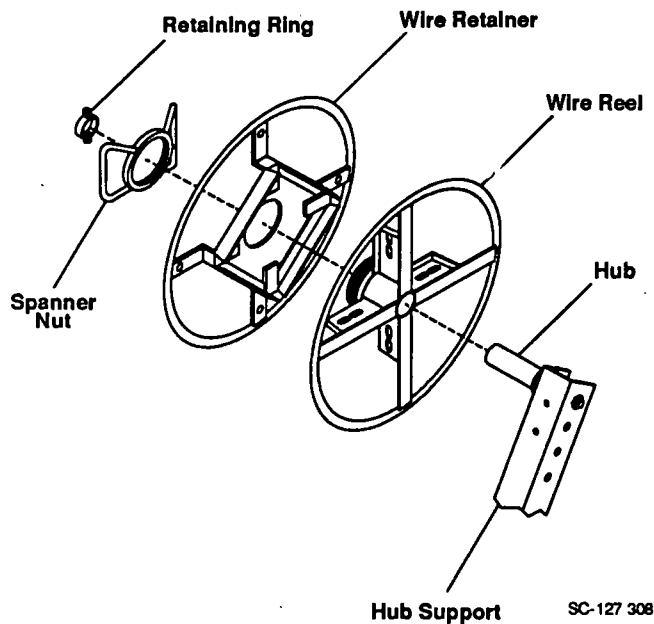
Optional Wire Reel And Reel-Type Wire Installation
